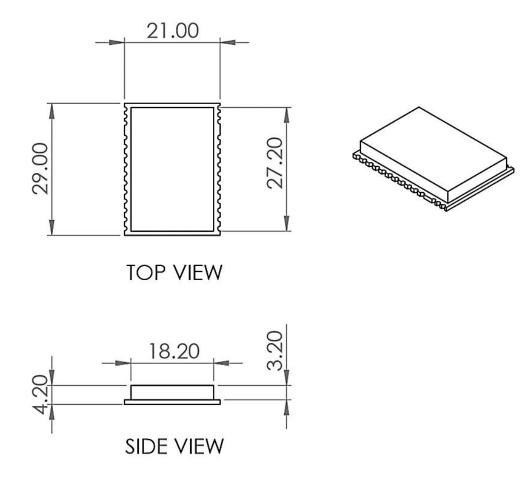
Dimensional drawing of RFD900ux/RD868ux modem
